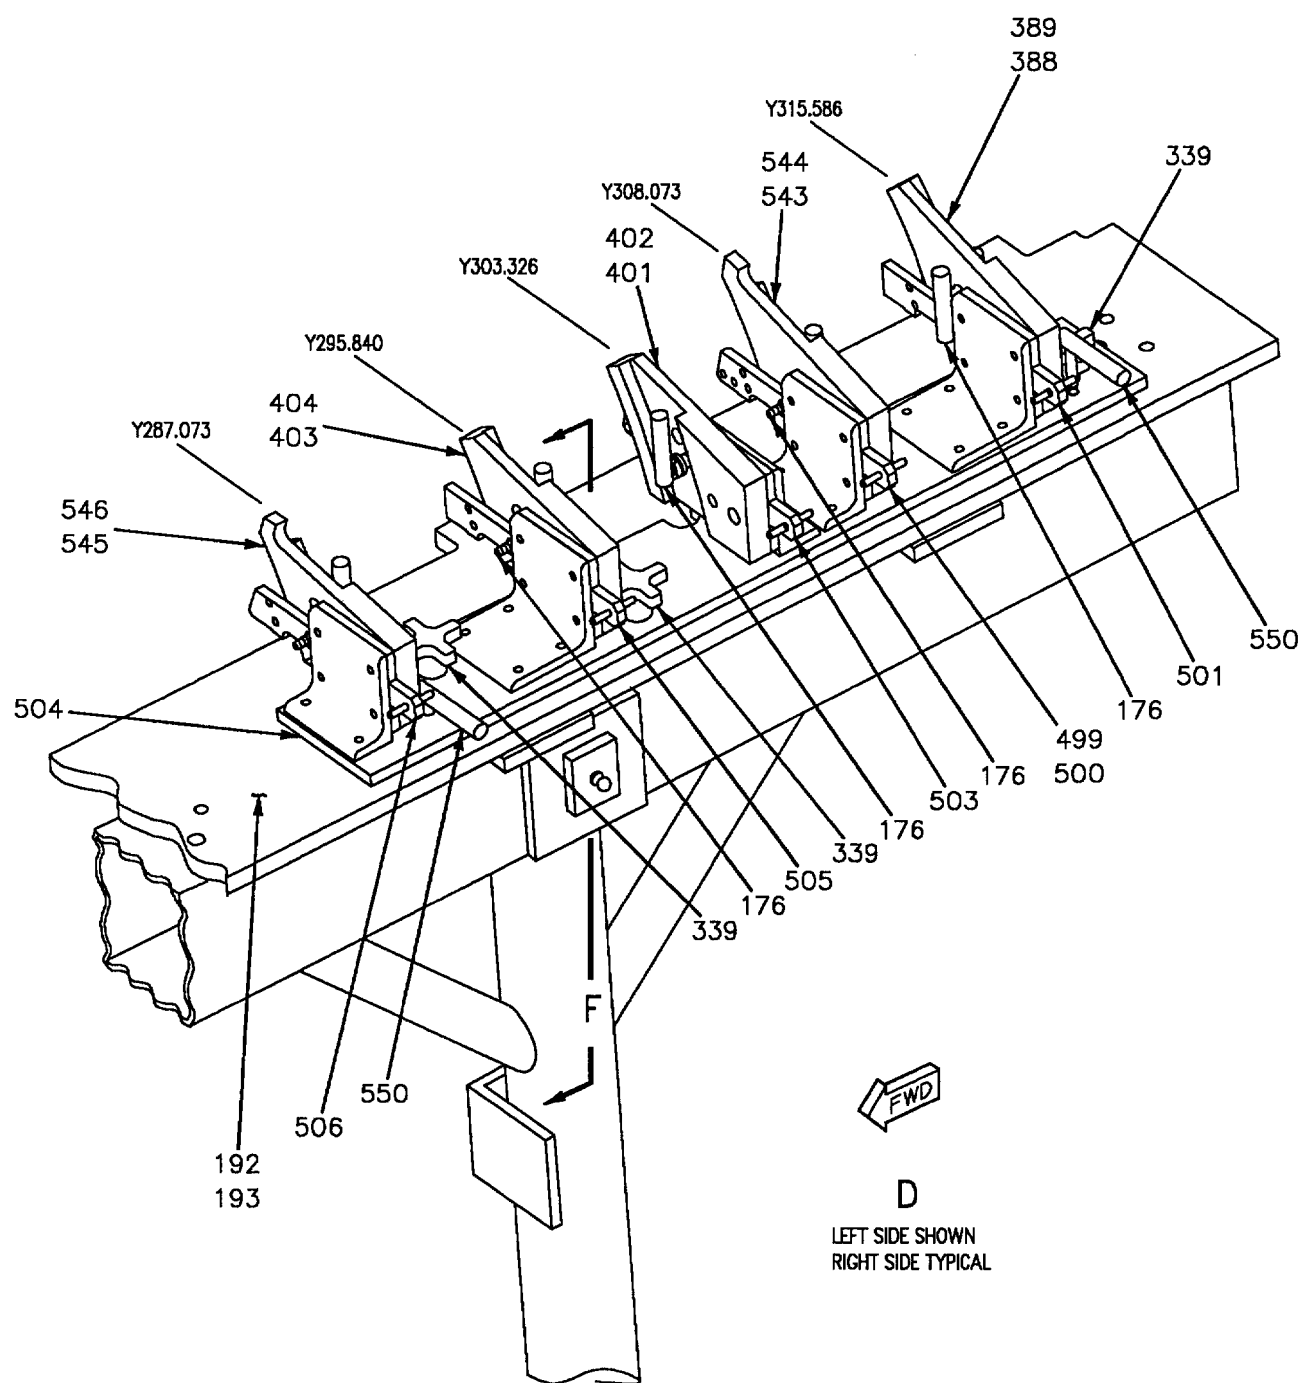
Replacement - Lower Fairing Support (Sheet 4)
